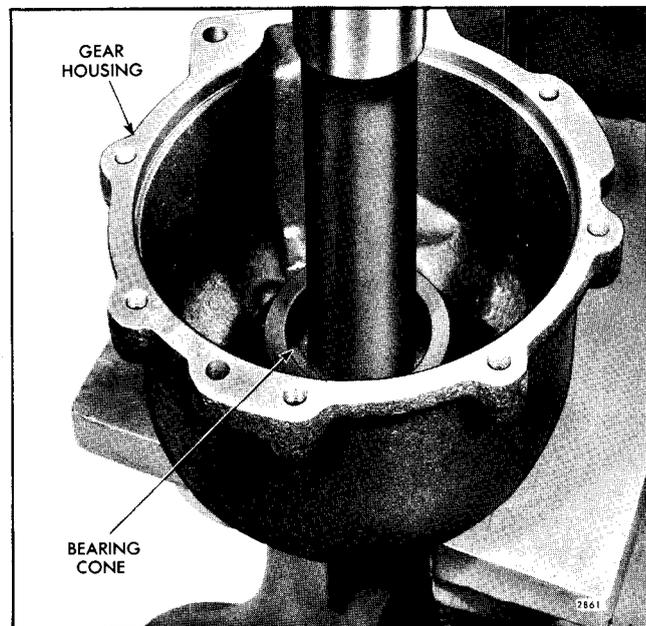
Removing Reduction Gear Drive Shaft Roller Bearing Cone and Cup from Gear Housing (2.1:1 Ratio)
